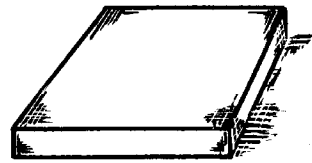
BENCH PLATE AND COMMON LAYOUT TOOLS
